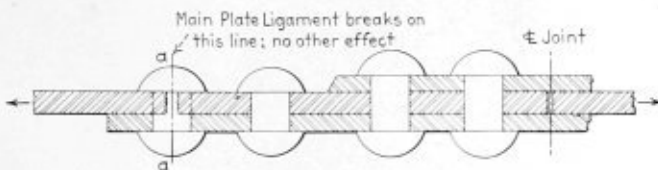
Illustrating Failure of Double Butt Strap Joint Through First Row of Rivets; Failure (T)
